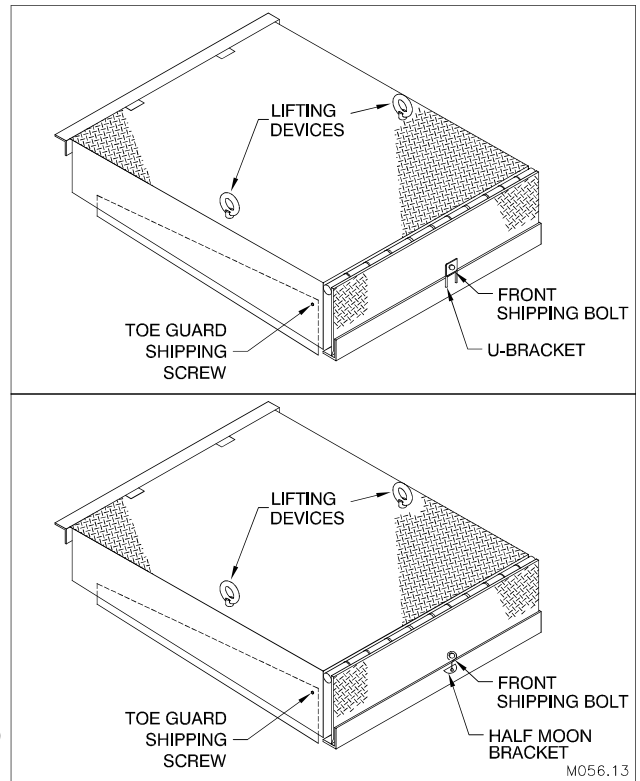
Shipping Wire, Bolts, and Lifting Devices.
